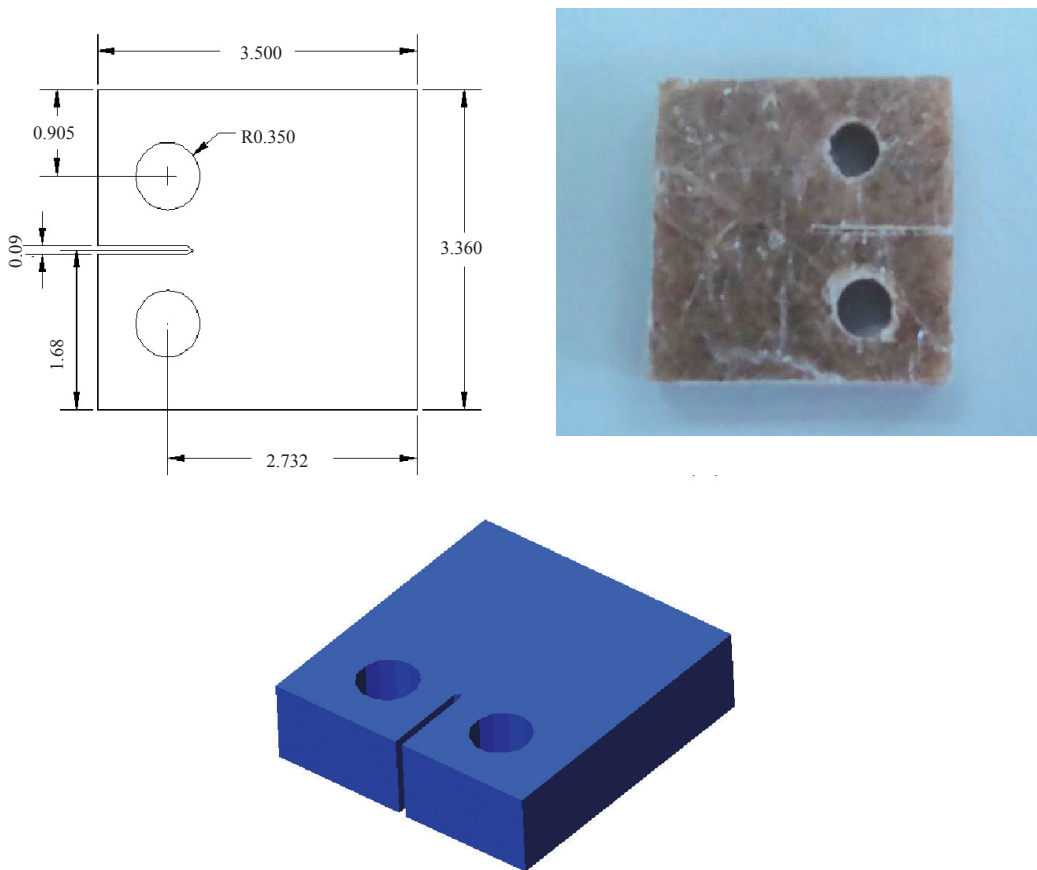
(a) The front view of the CT specimen; (b) the compact tension specimen 20% KM -80% UP; and (c) Izo AutoCAD drawing of CT specimen
